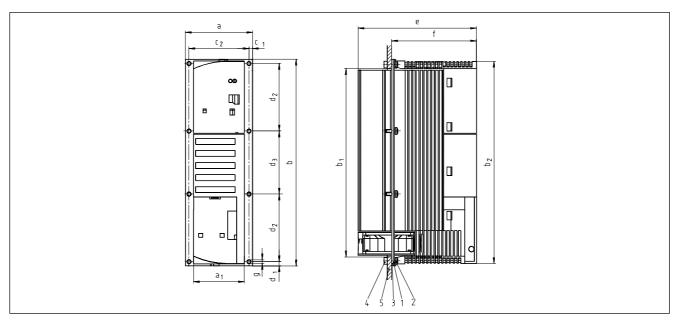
Dimensions for thermally separted mounting 1.5 ... 2.2 kW
